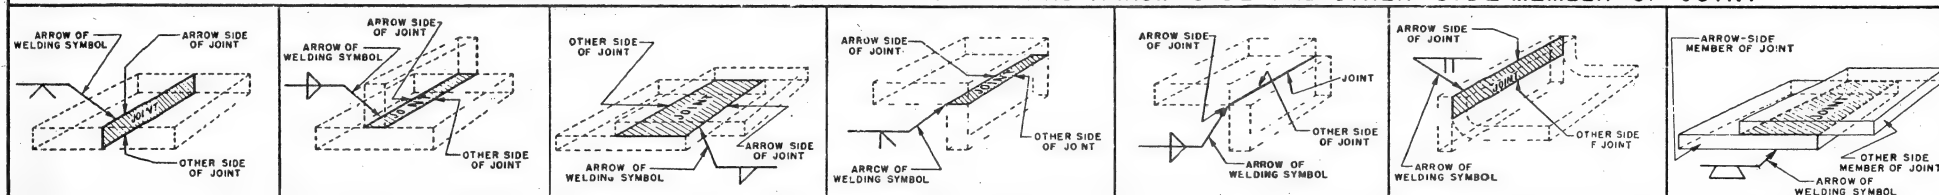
Use of Arc Welding Symbols on Marine Drawing
